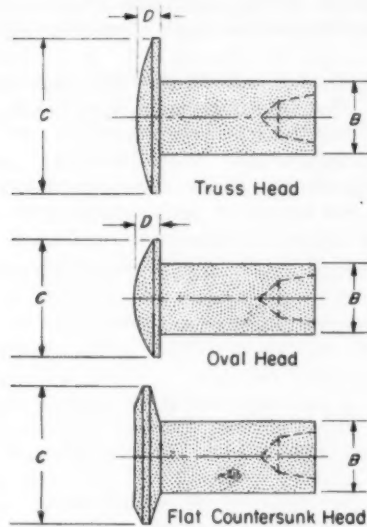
Semitubular rivets. Nominal dimensions are given in Table 1.
